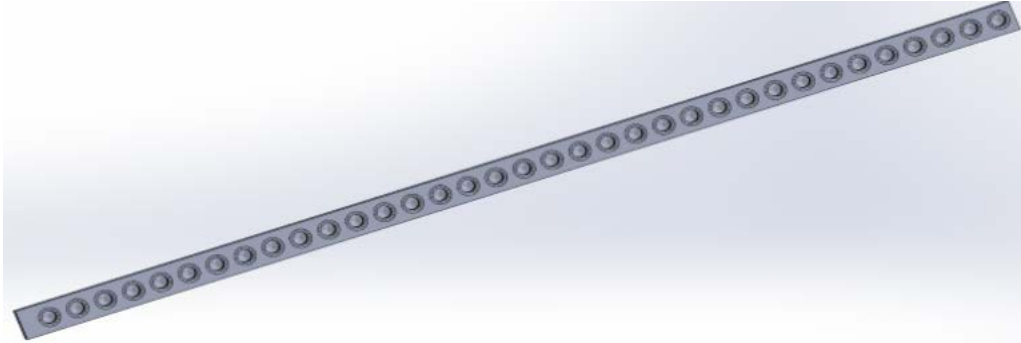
14 inch aluminum rod consisting of 35 holes threaded for 1/4 -20 screws.
